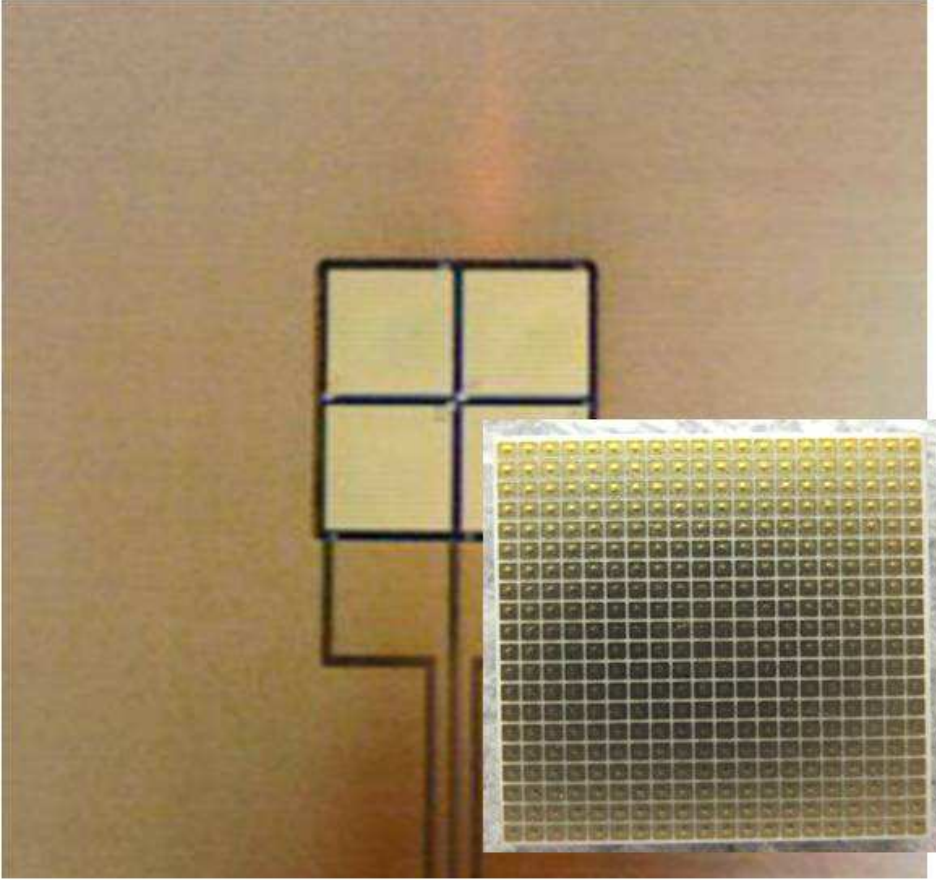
Four CCPCBs are mounted on a MBPCB. Inset shows a zoom-up of a CCPCB.
